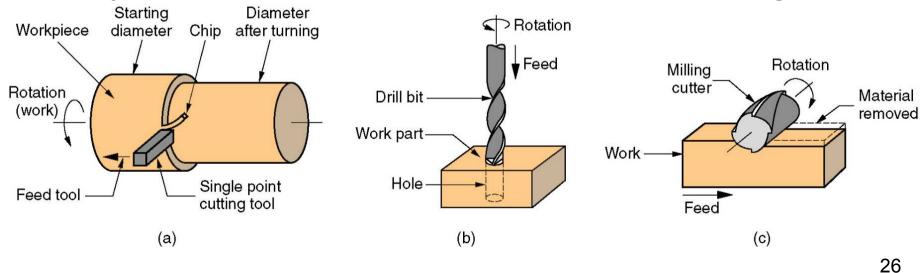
Material removal processes. (a) turning (b) drilling and (c) milling.
